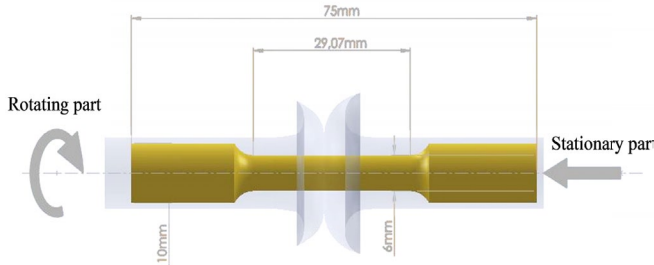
Tensile test piece and its location in the welding piece
